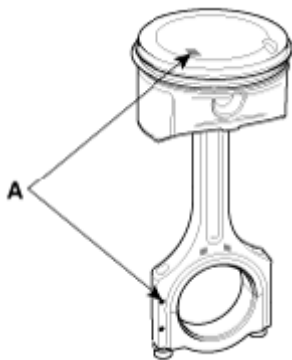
Identifying Piston Front Mark And Connecting Rod Front Mark
